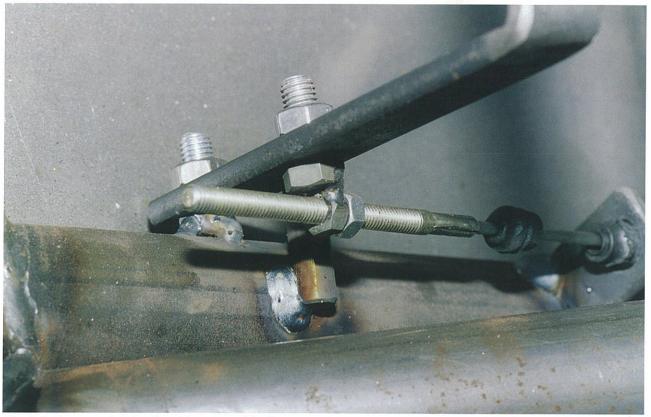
Because the clutch cable we used had a screw thread on one end, I adapted the fixing to give a more easily adjustable cable. (Steve Williams)
